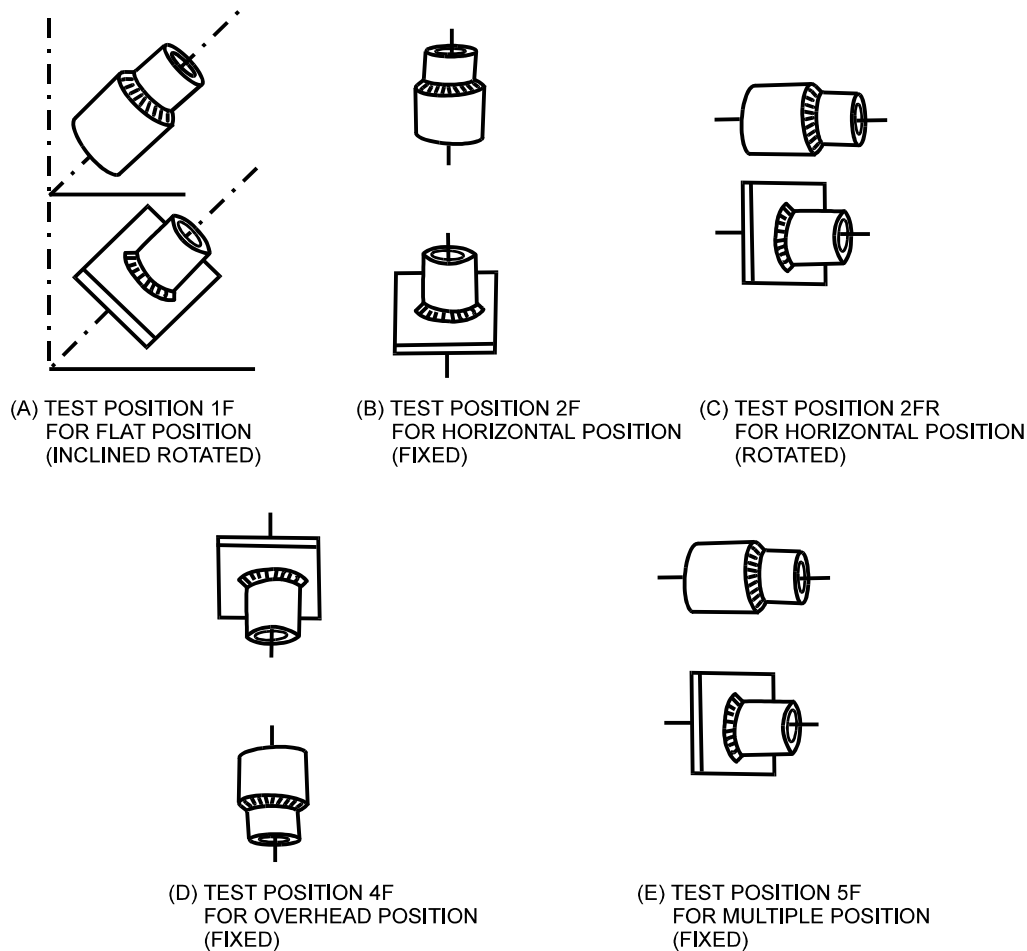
Position for Test Pipes for Fillet Welds (see 5.6.1.4)
